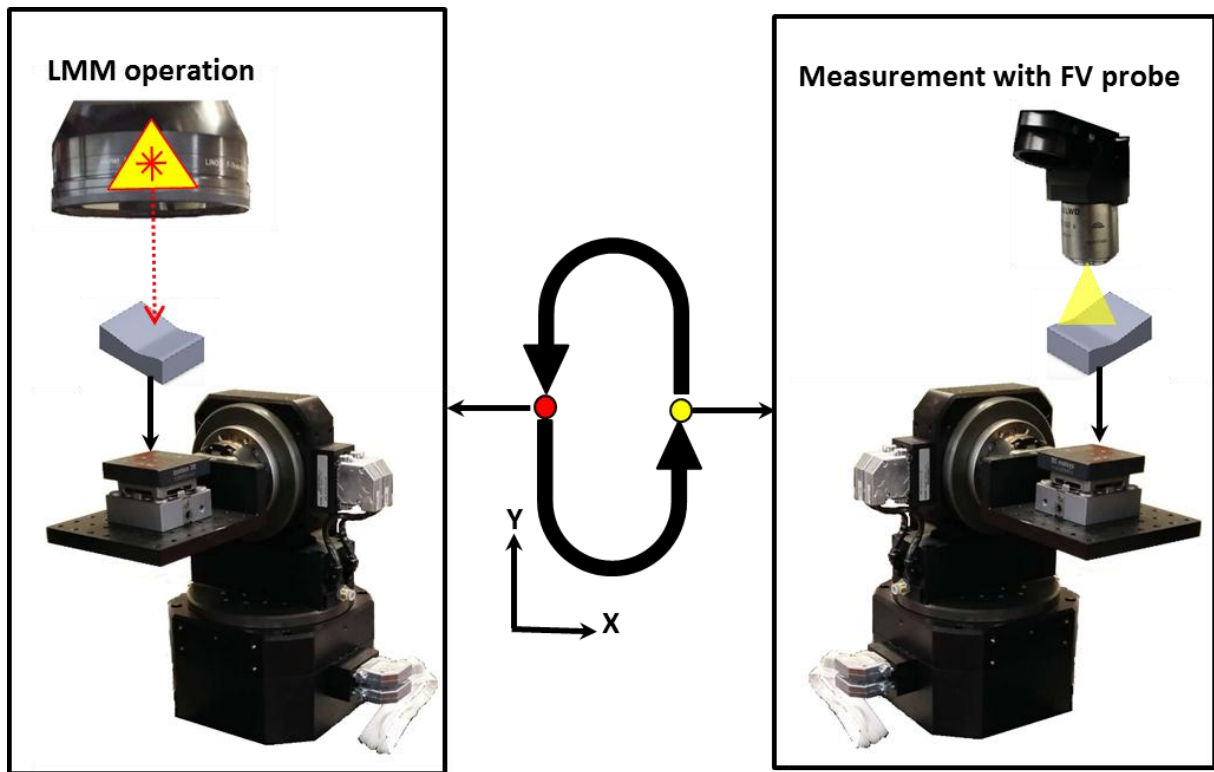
Workpiece's setting up routine with a FV probe integrated into a LMM platform with C rotary stage to swivel between machining and inspection positions
